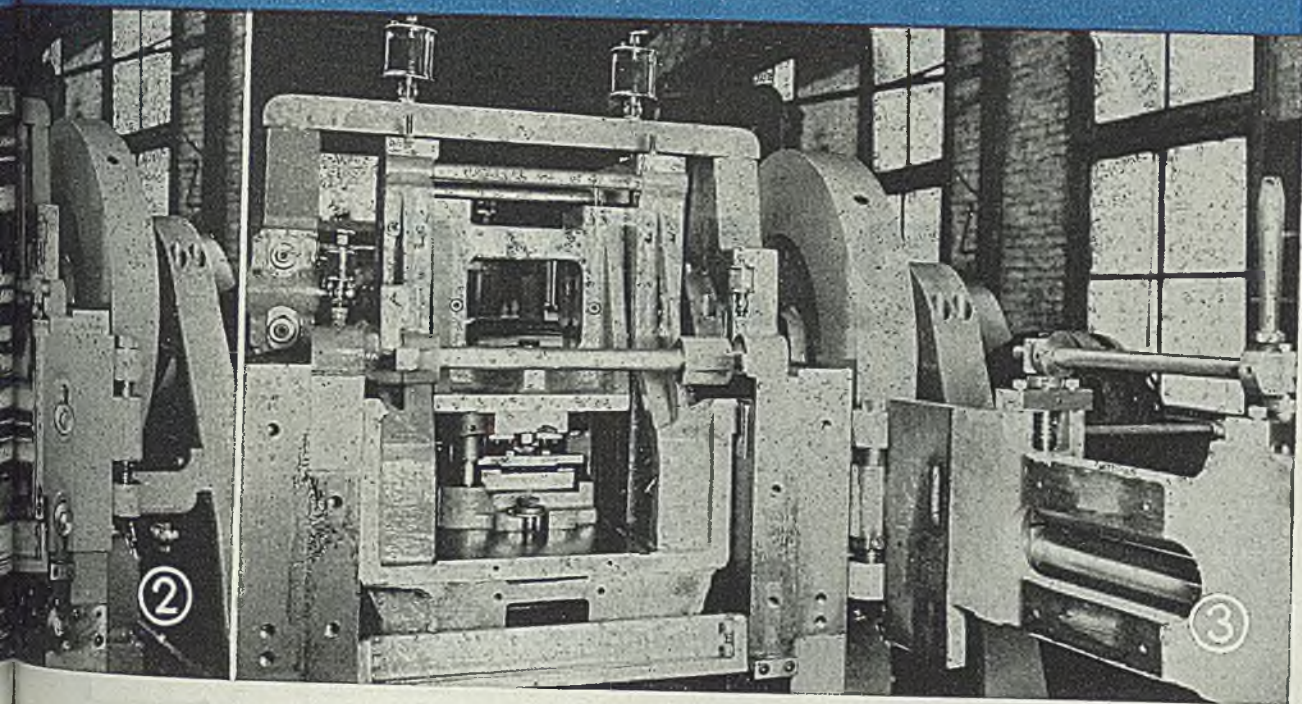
Ferracute high speed press shown with roll feed mechanism in place
